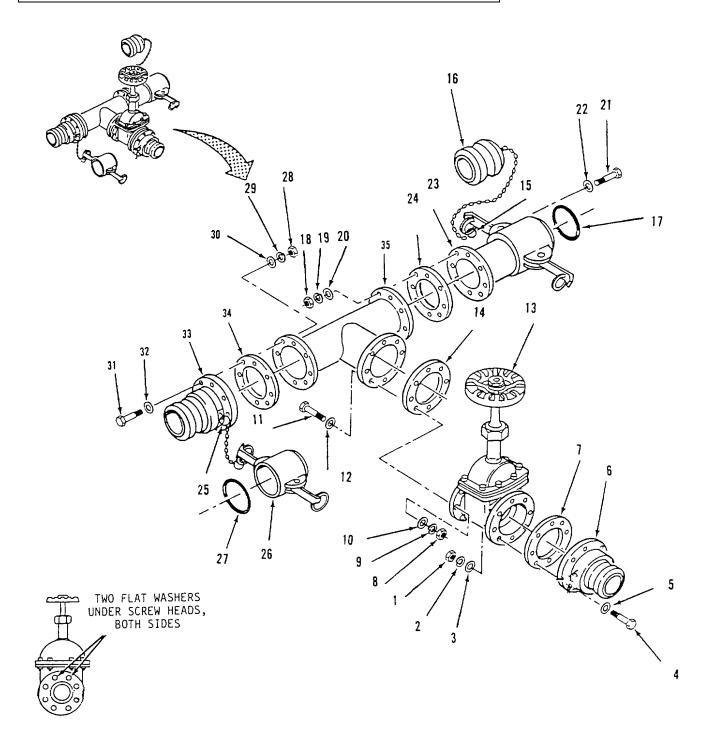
Tee and Gate Valve Assembly (9133-Y1) Assembly.
